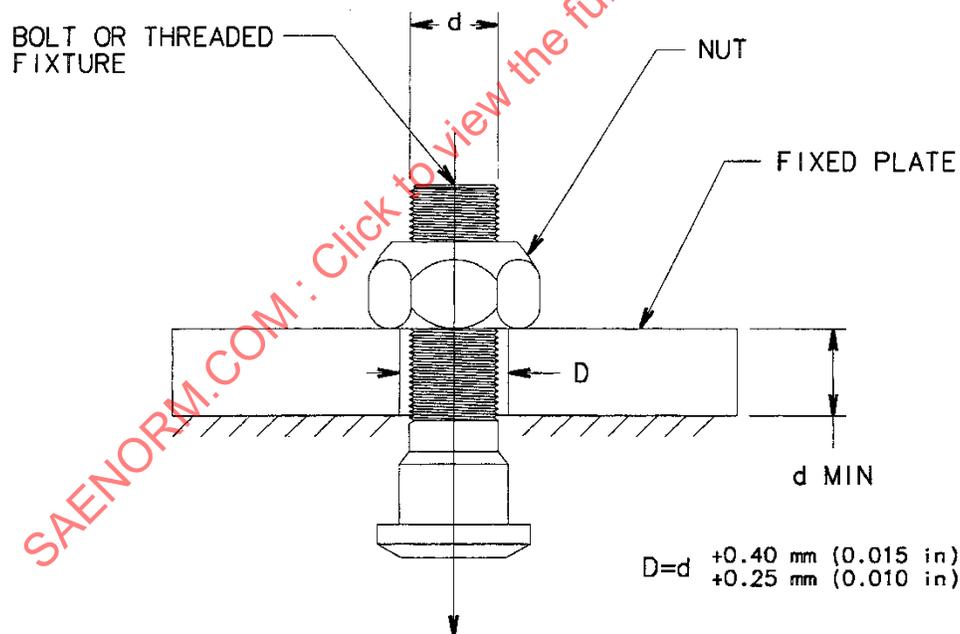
Single and outer ball seat or rim clamp nut proof load test method
